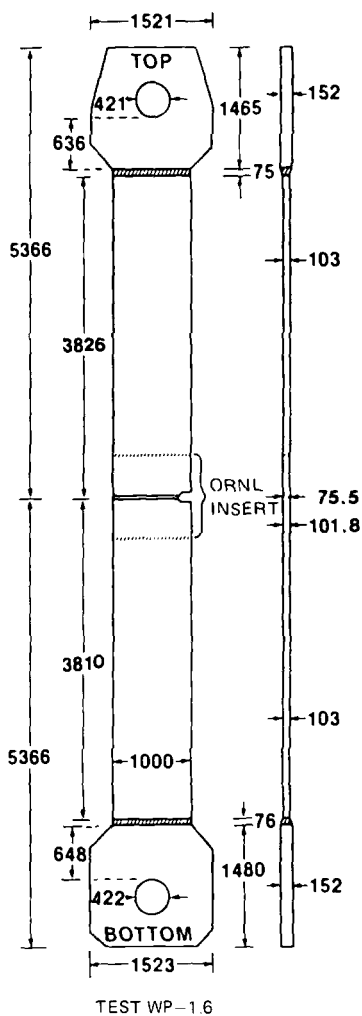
Overall dimensions for HSST wide-plate crack-arrest Specimen WP-1.6.
